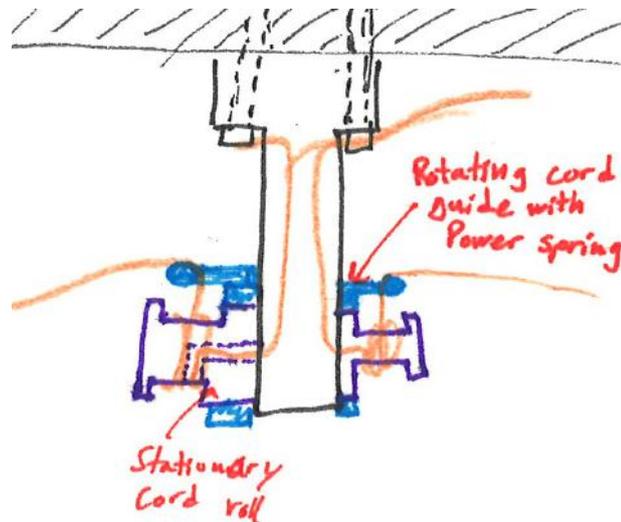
Concept 5 - Fishing reel cable winder. A concept inspired by a fishing reel where the cable is wound on top of the axle instead of the axle itself being spun to wind the cable. This eliminates the need of a slip ring or similar. For a bi-parting door two identical mechanism are mounted opposite to each other on a bracket (as seen in the figure) that is mounted in the middle of the header profile.
